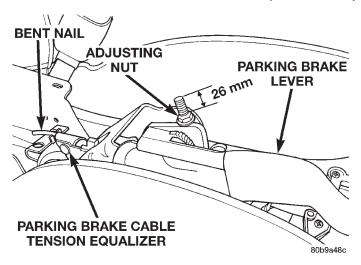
Parking Brake Adjustment (Rear Disc Brakes)
